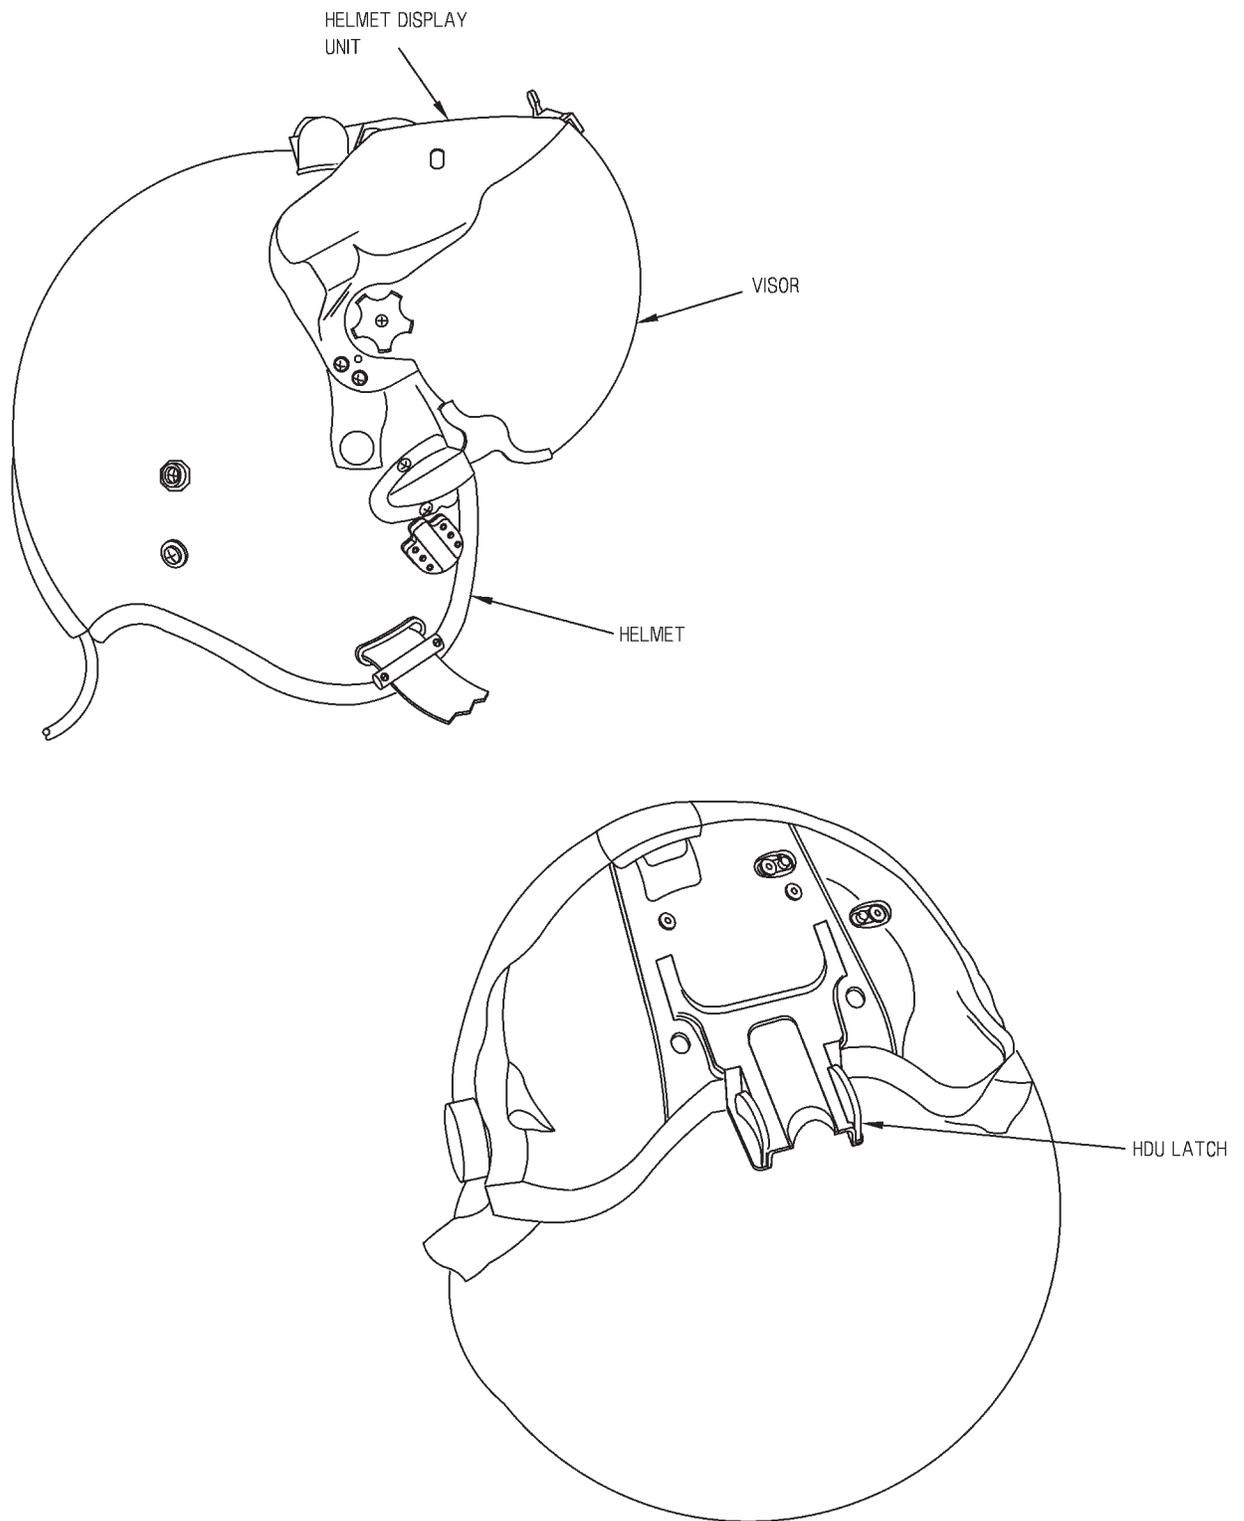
Relay Optics Assembly, Part Number 135150-1 (Sheet 1 of 3)
